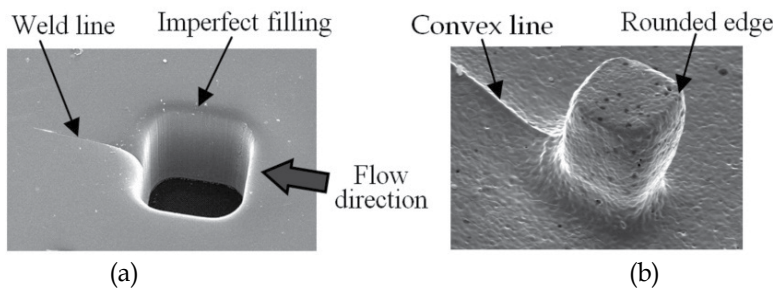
Defects caused by injection molding of SP-mold; (a) SP-mold; (b) Sintered part.
